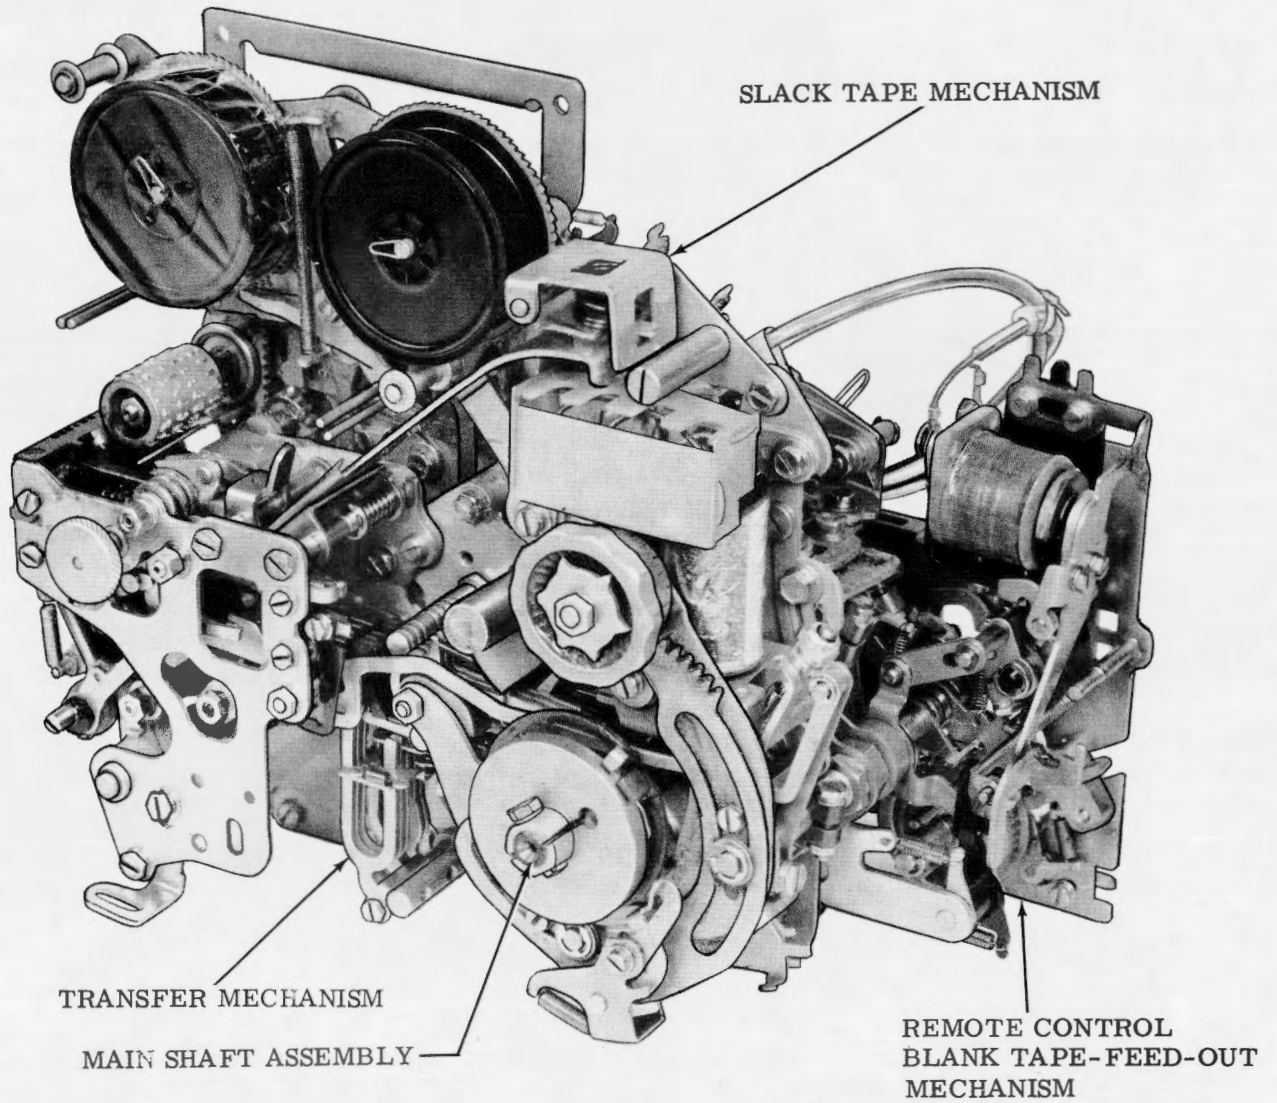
28 Typing Reperforator Unit With Remote Control BLANK Tape Feed-Out Mechanism (Fully Perforated Tape)
